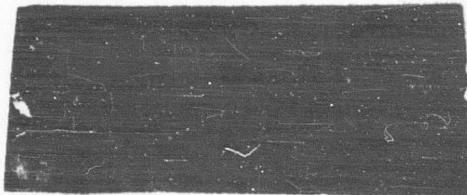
"CARPENTERS STAINLESS NO. 20 Cb" in Sulfuric-Dichromate cleaner. Note weld porosity, undercutting at lower right end of weld, and attack at edge of heat-affected area.
